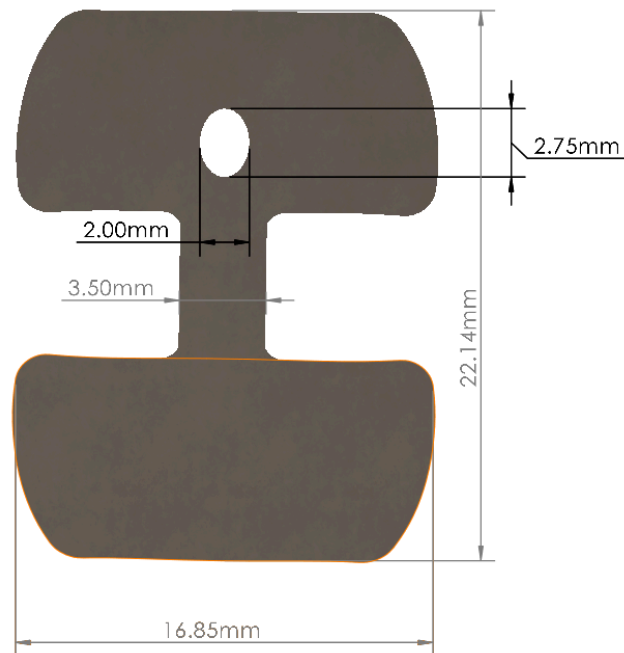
Flattened SolidWorks model to be used for waterjet cutting.
